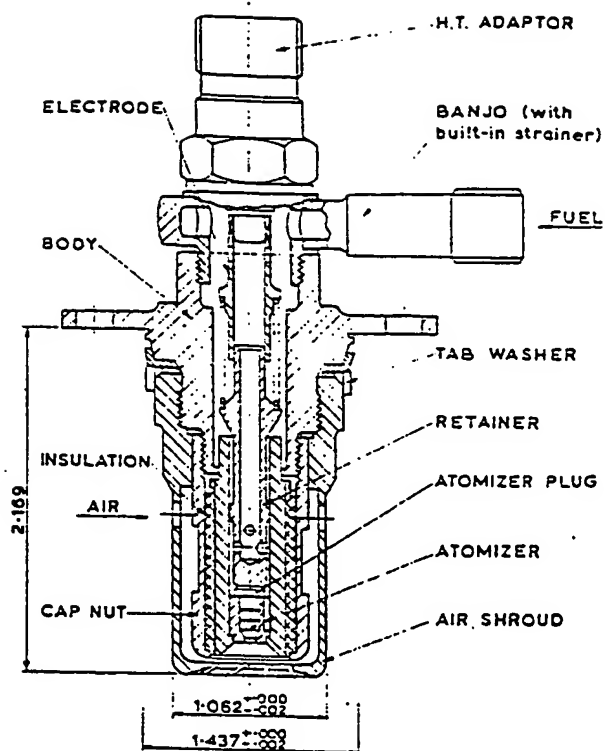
Austin 250 industrial gas turbine, Lucas sprayer igniter
